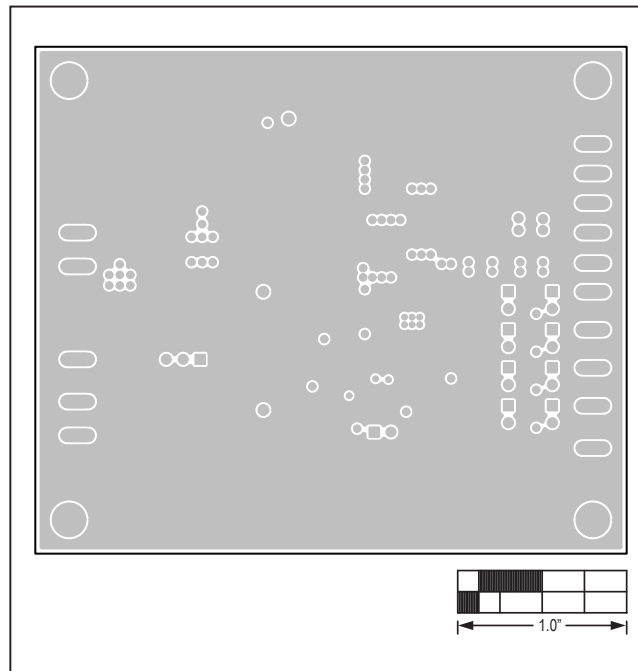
MAX16813 EV Kit PCB Layout—SGND Layer 2
